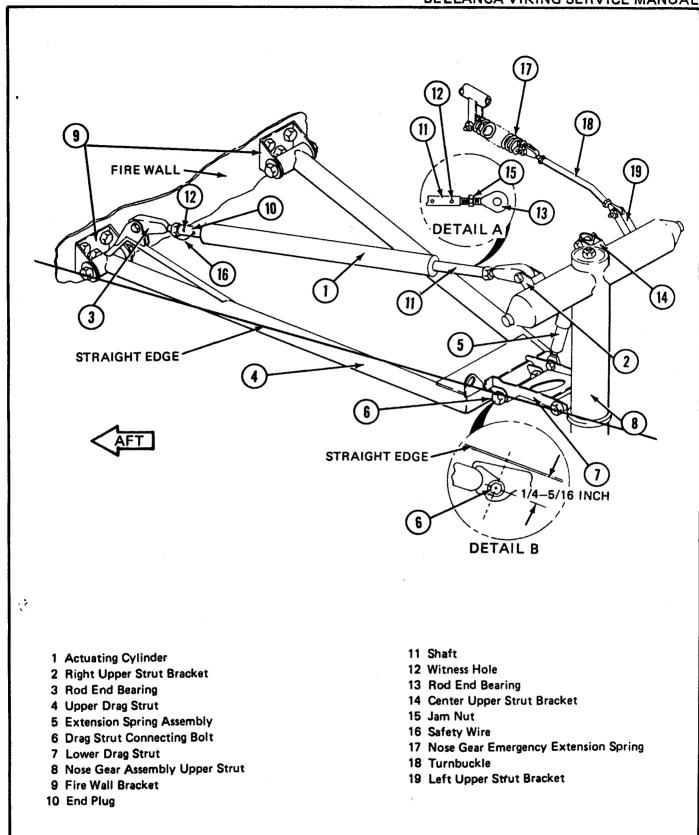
Nose Gear Actuating Cylinder, Drag Struts, and Nose Gear Extension Spring,
